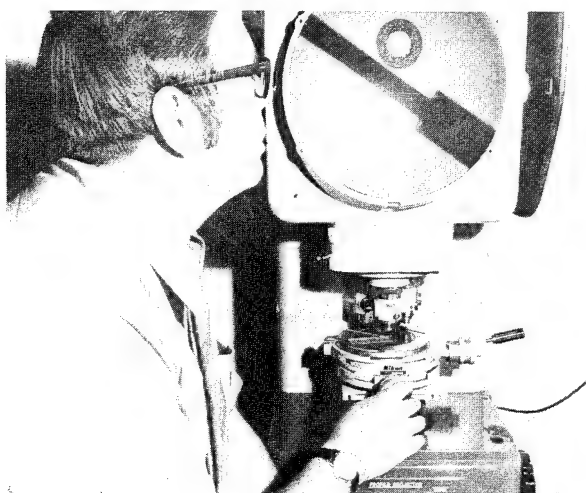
INSPECTING FOAM-SKIN INSULATION
